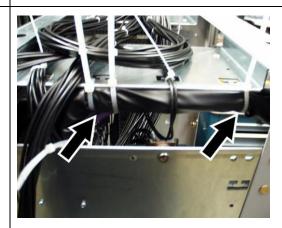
The protective hose must extend into the cable duct and be fastened with cable ties.
